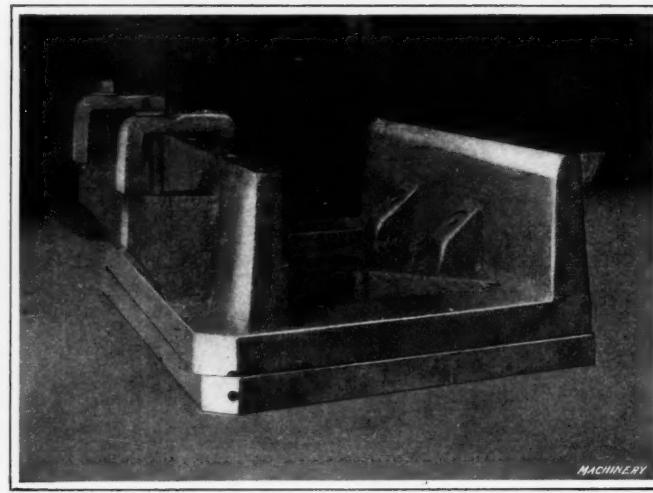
Fixture mounted on Swivel Base to provide for planing Bearing for Taper Gib in Cross-slide
